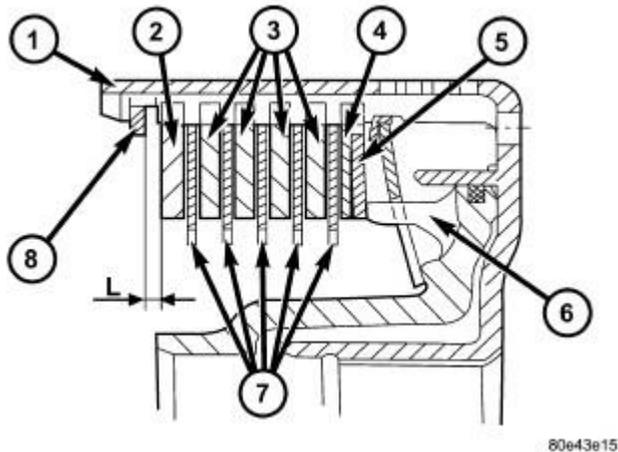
Input Clutch K3 Stack-Up - Double Sided Discs
